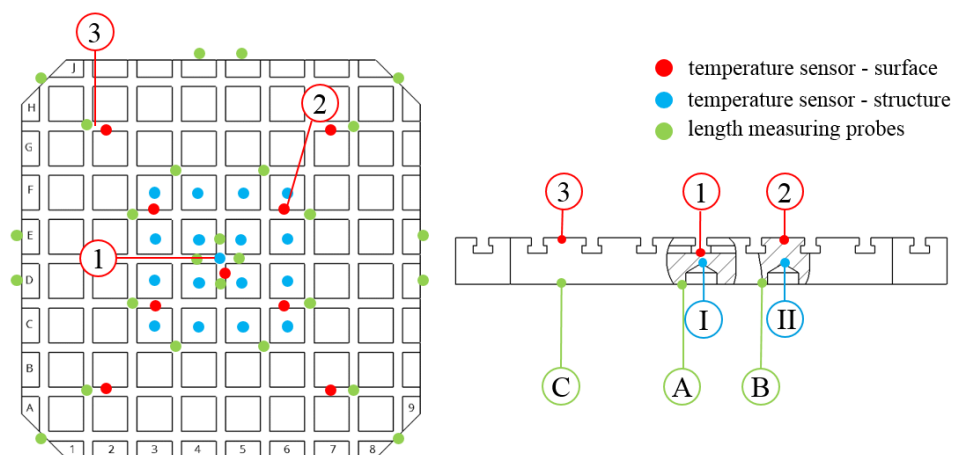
Schematic sensor positioning on the machine table, left: top view, right: side view
